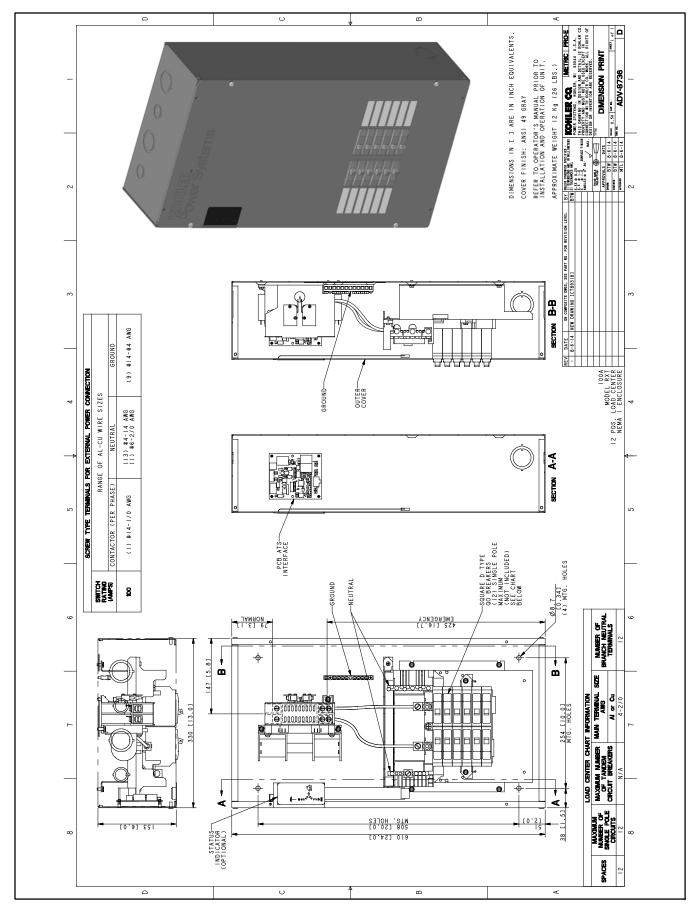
Enclosure Dimensions, 100 Amp NEMA 1 with 12-Space Load Center, ADV-8736
